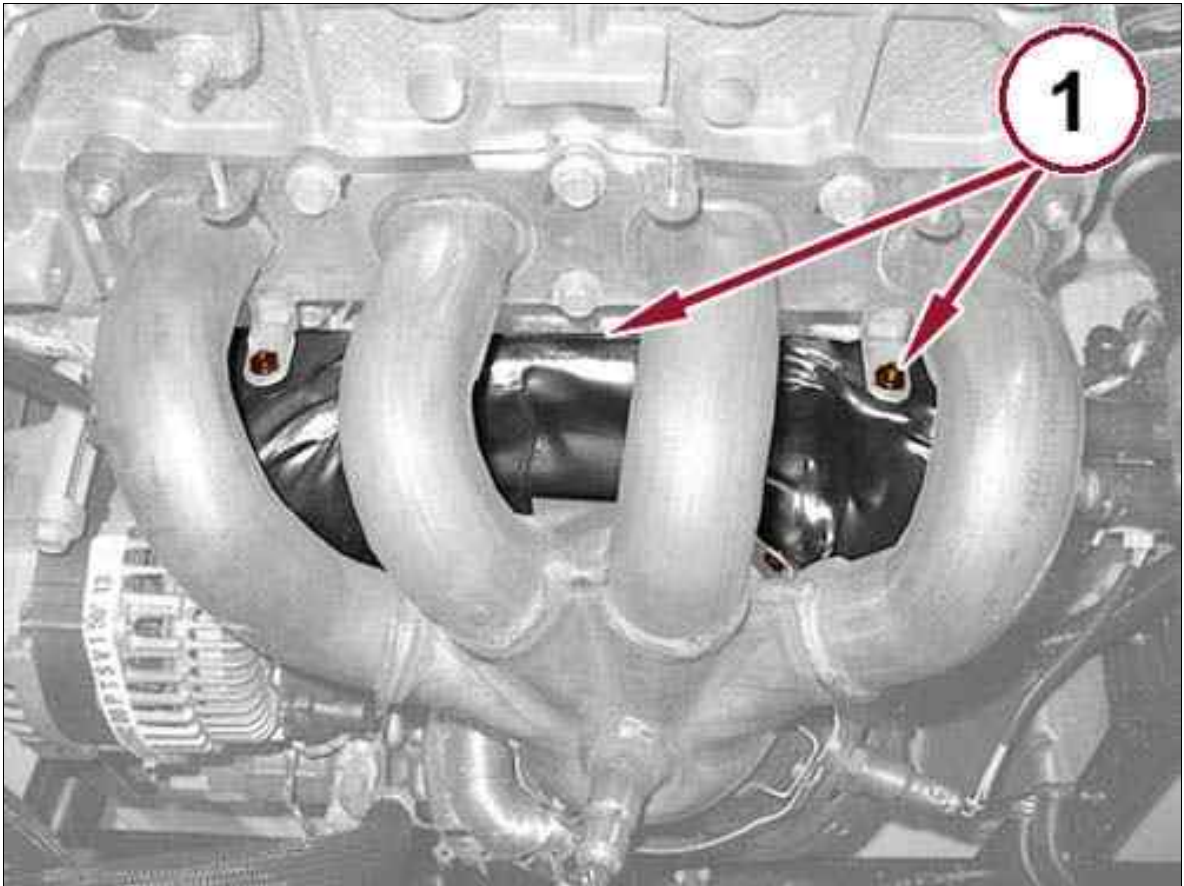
Oxygen Sensor Wiring, Clamps & Exhaust Manifold Upper Heat Shield
